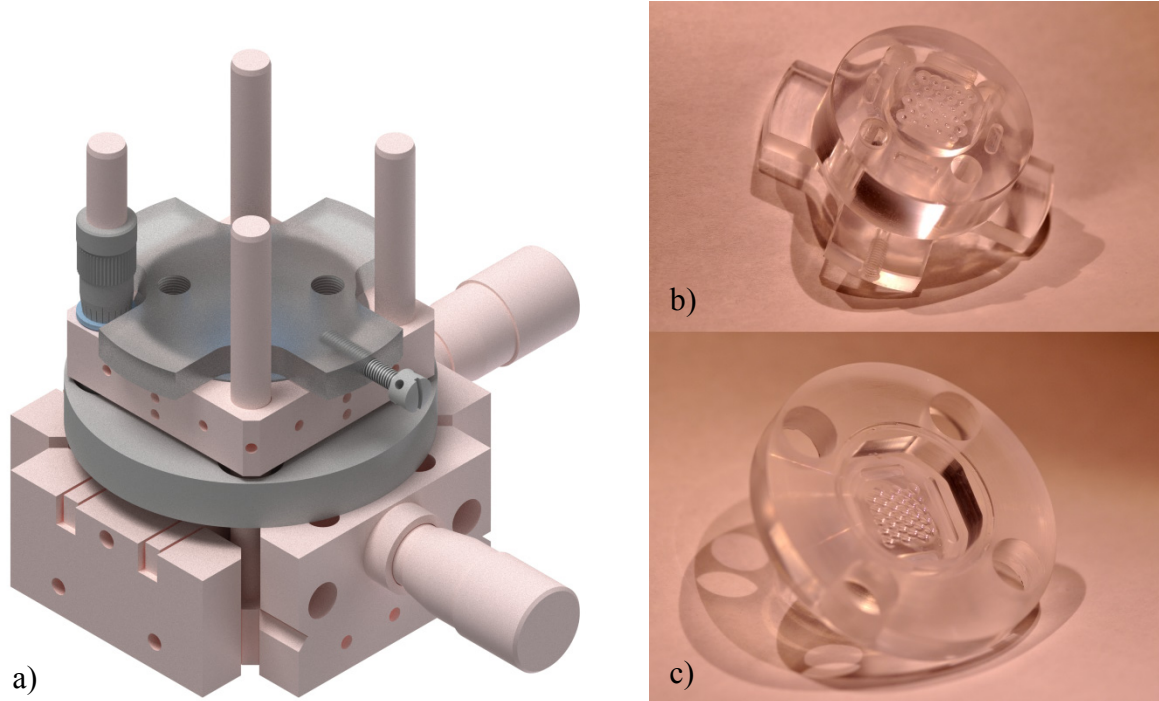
a) Mold for the PDMS casting. b) Upper and c) lower part of the mold which are both fabricated in PMMA.
